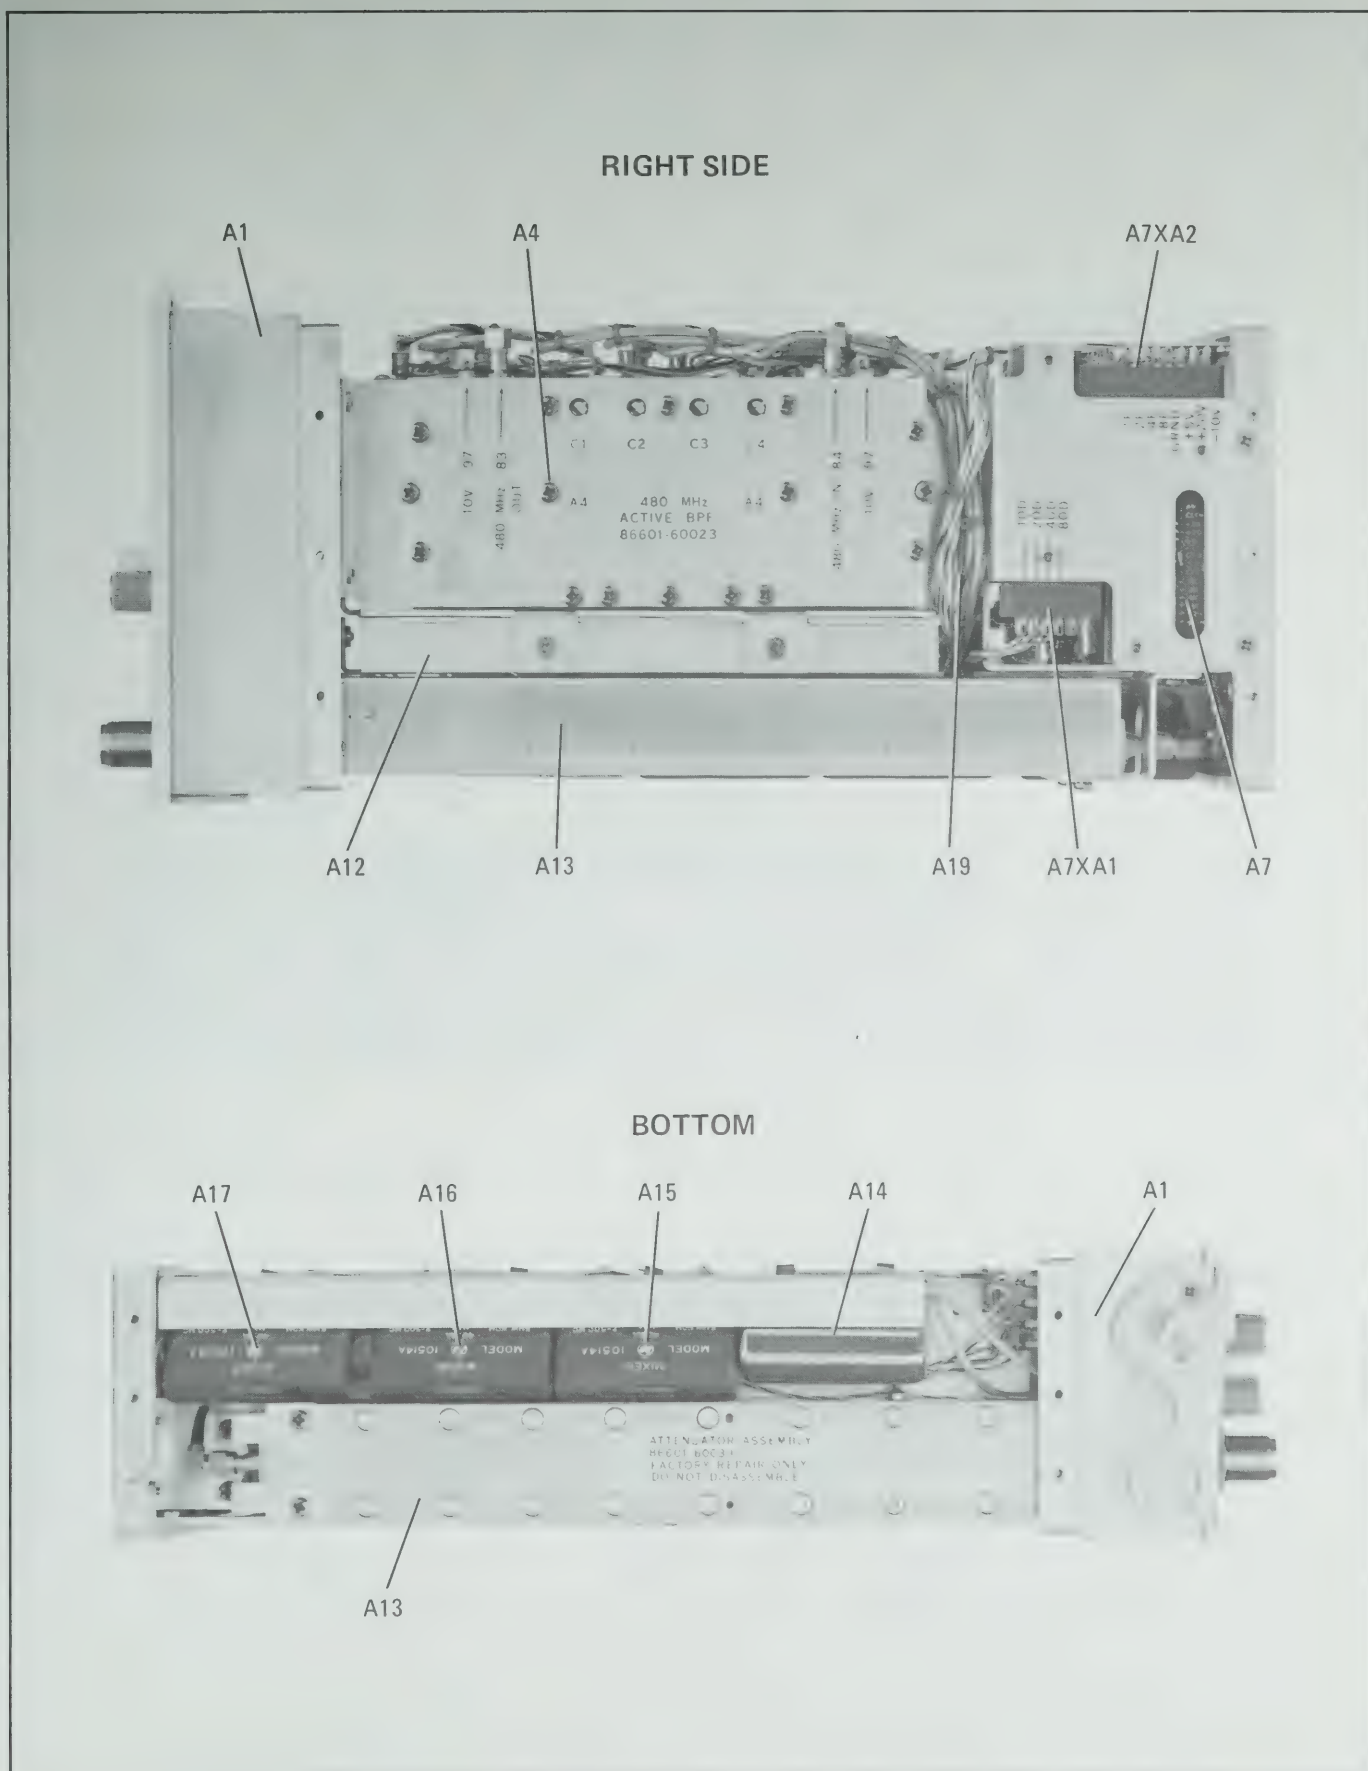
86601A Test Points and Assemblies (2 of 2)
